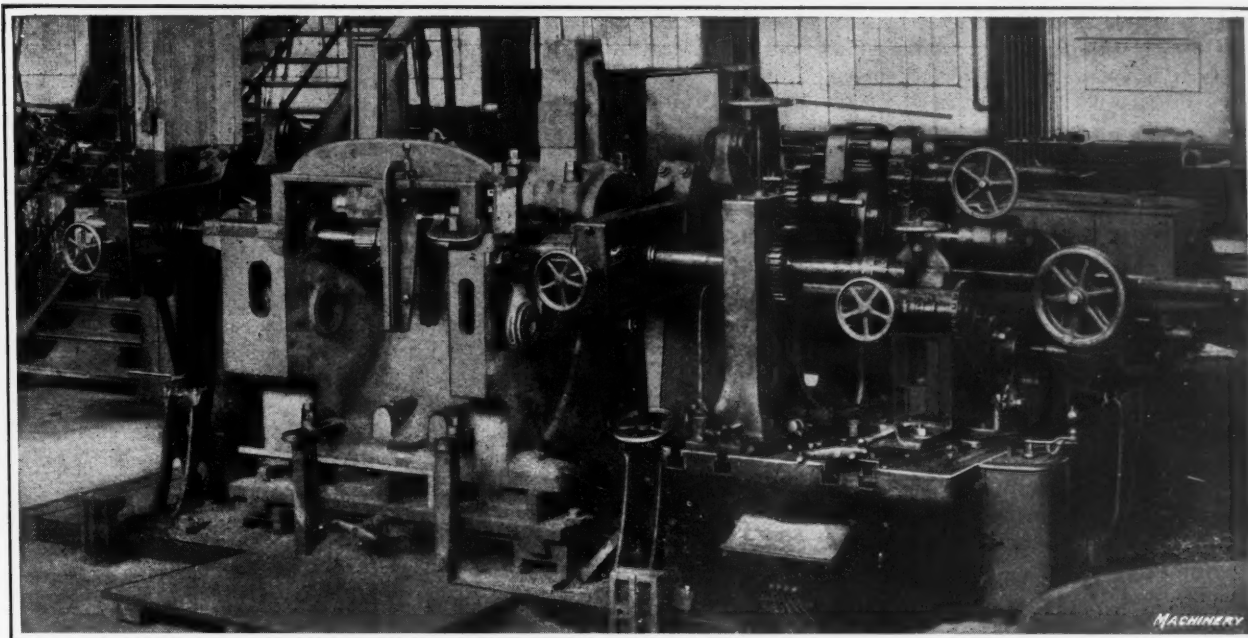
Horizontal Boring Machine designed for Boring, Reaming and Facing Operations on Lathe Headstock and Tailstock Castings
